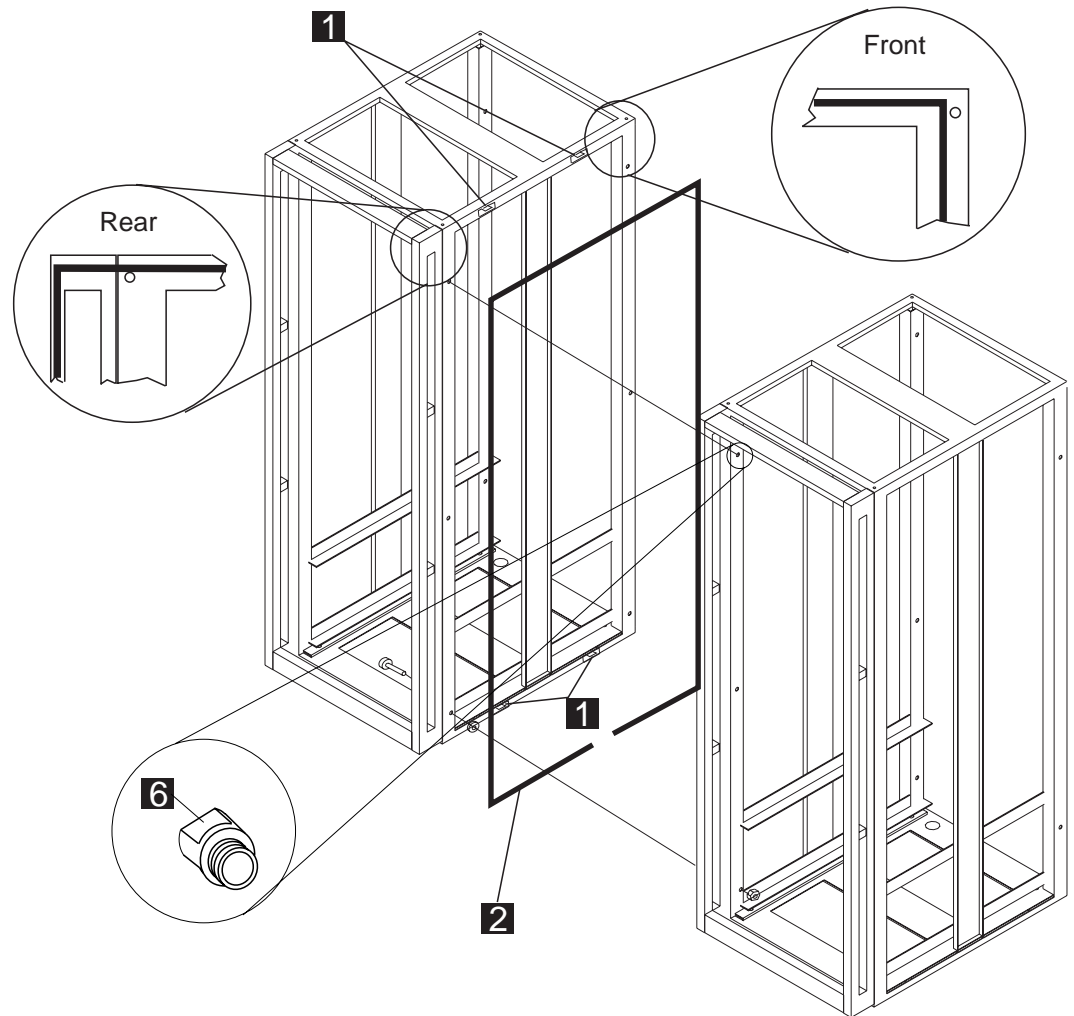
Attaching the 2220-501 Frame to the 2220-500 Frame (37 U Rack)
